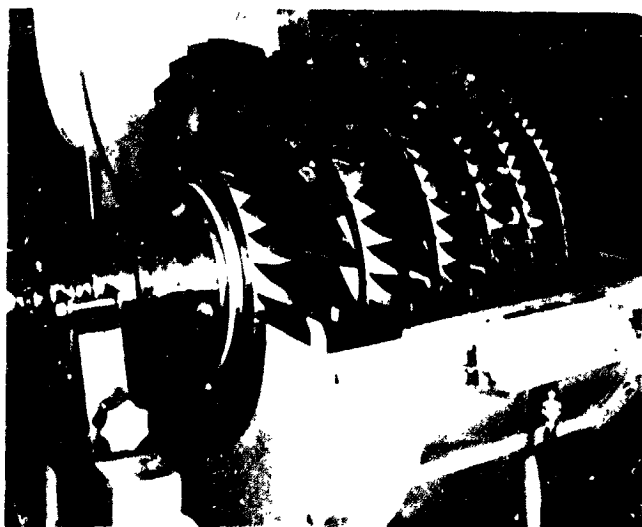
The forward rotor assembly of the high-pressure compressor in GE's Energy-Efficient Engine is shown here in a dynamic balancing machine.
